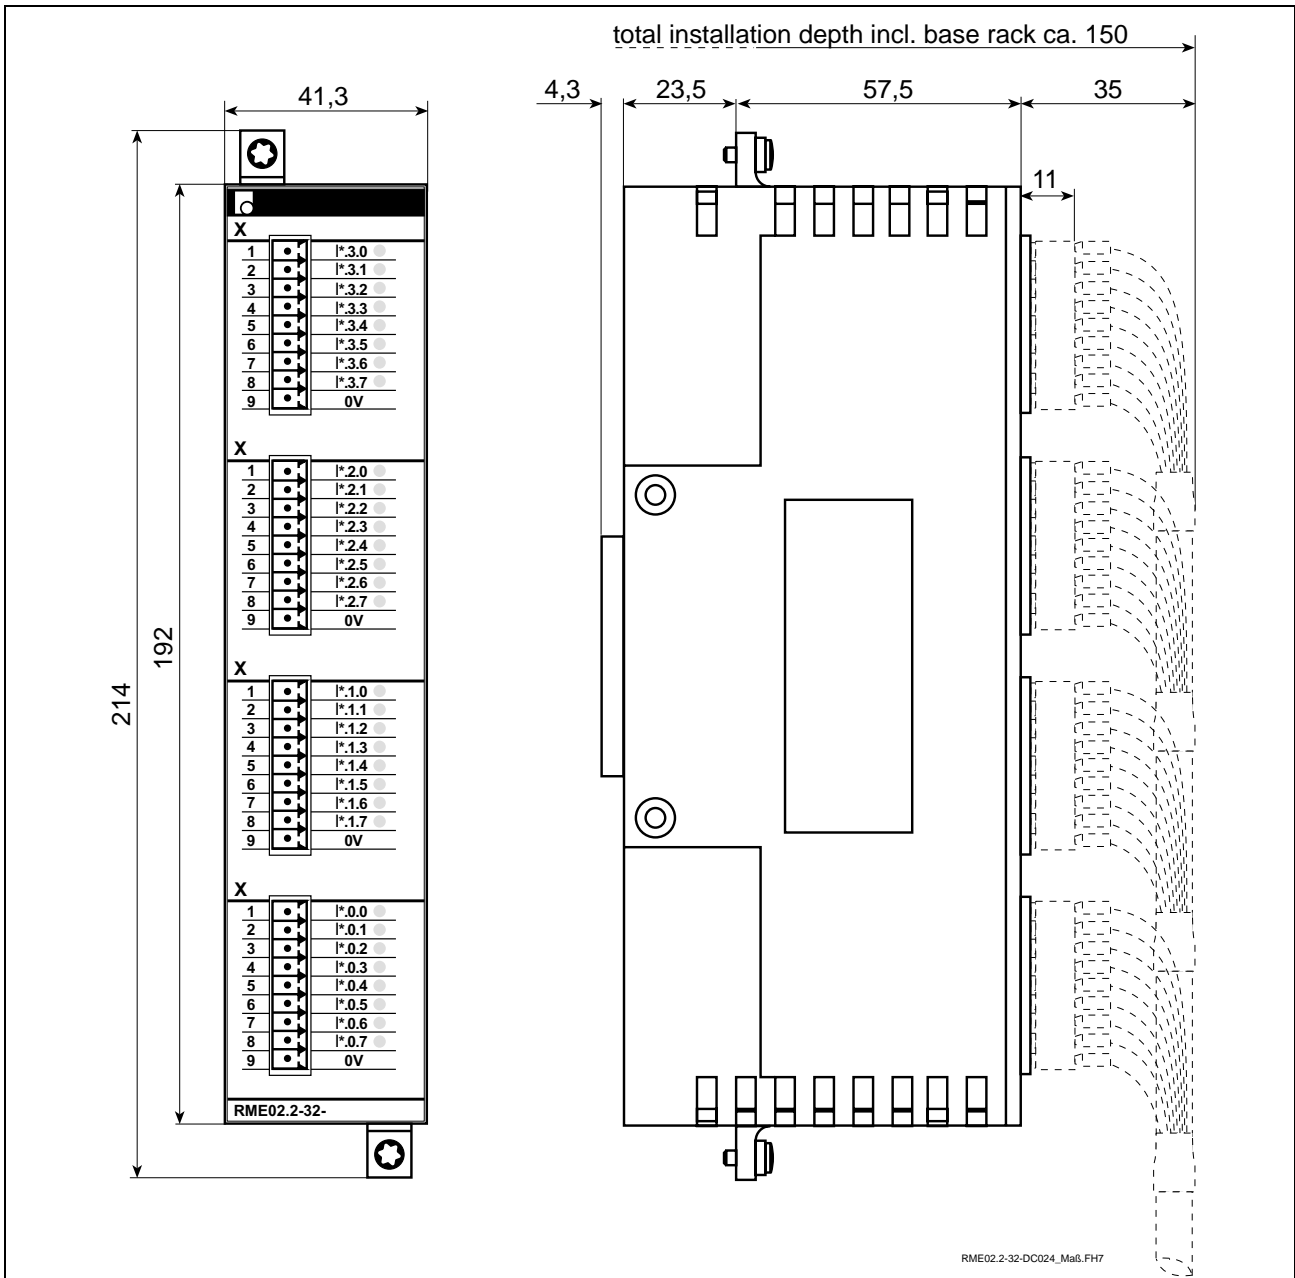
Mounting dimensions RME02.2-32-DC024
